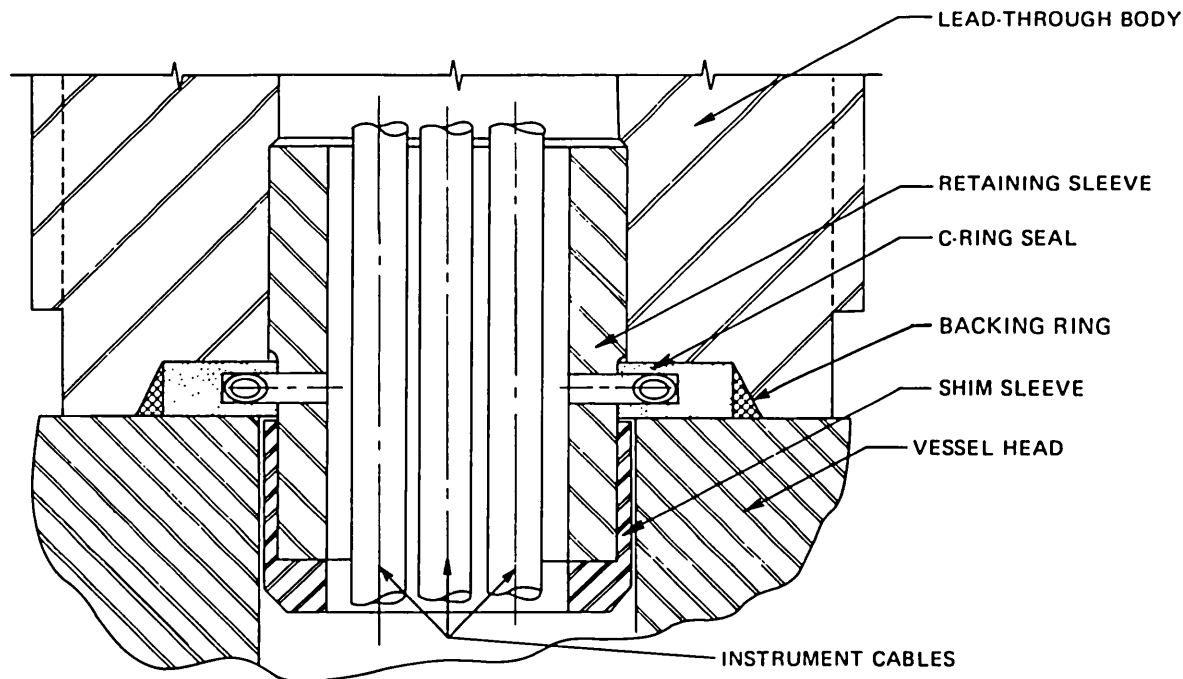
Details of C-ring seal assembly for instrument penetration.
